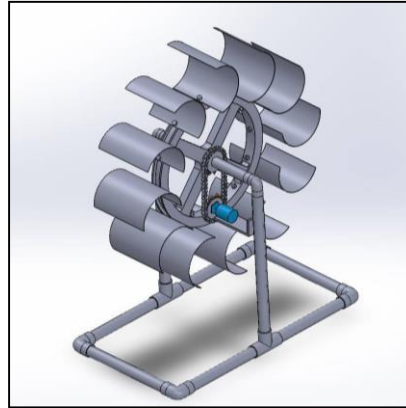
Assembly drawing of the prototype waterwheel hydro generator
